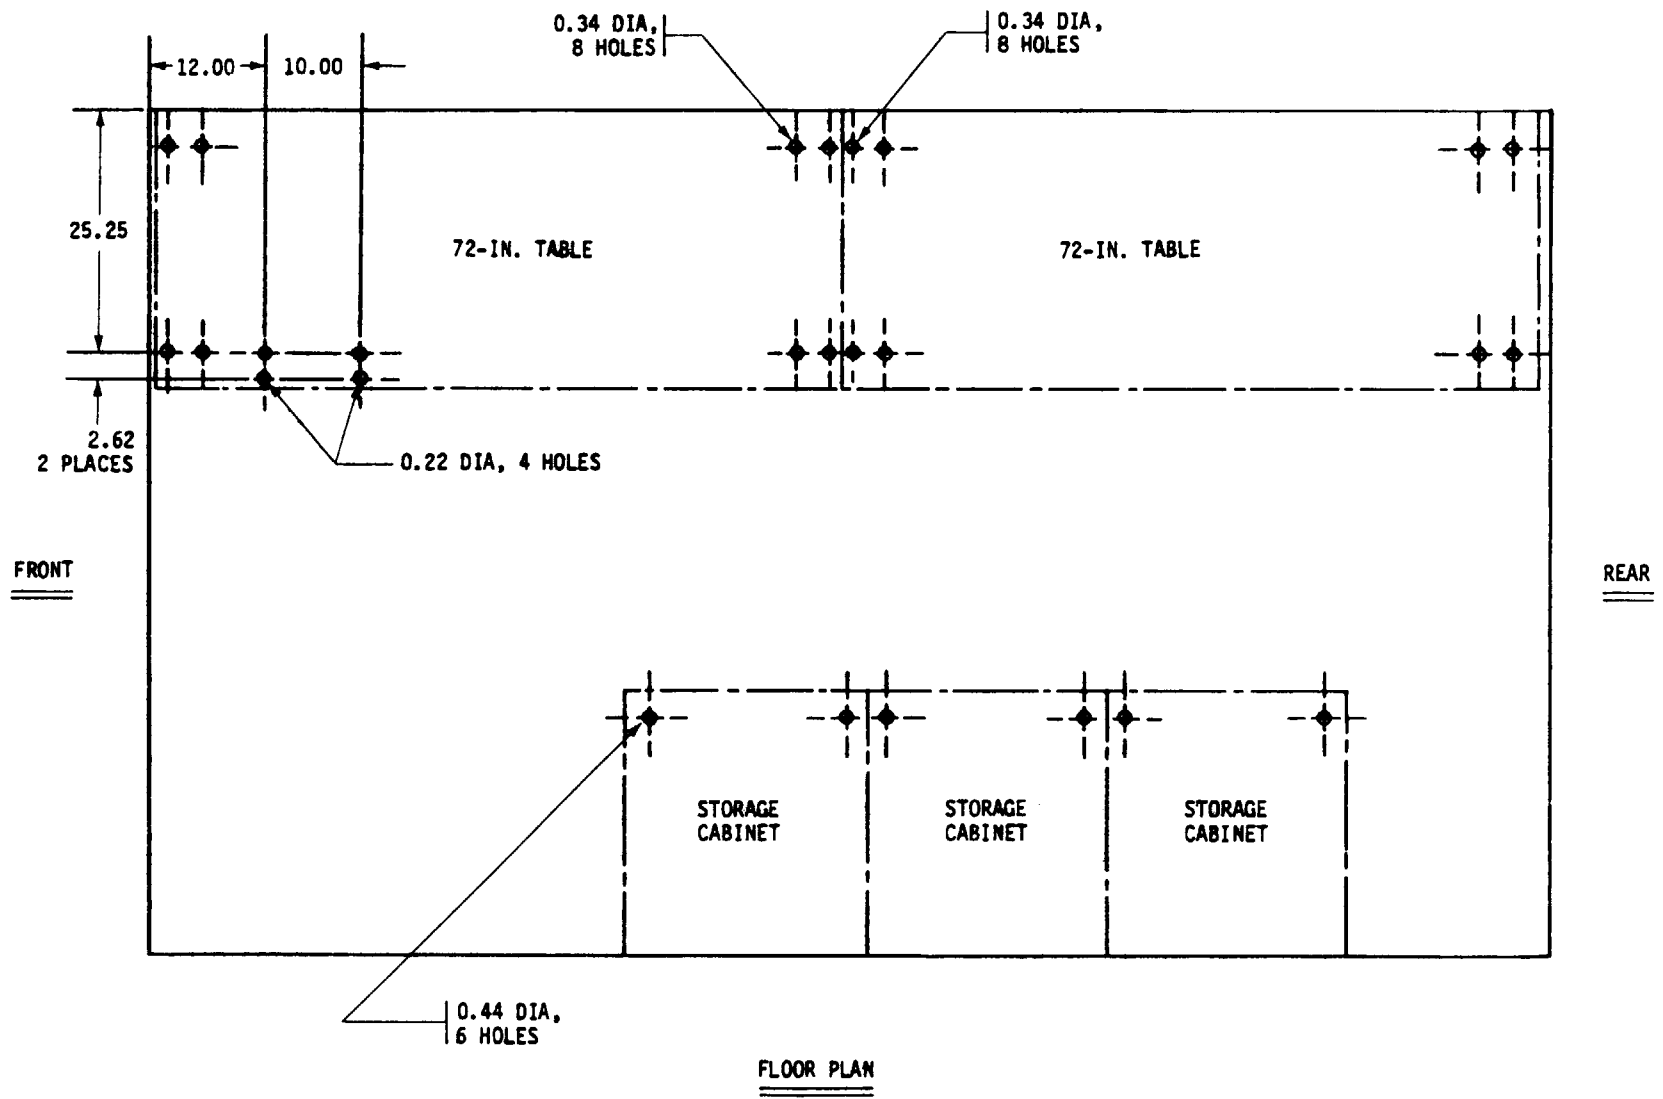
Hole Dimensions for Mounting Holes and Strap Loops, Unit 3, M35A2, Floor Plan.
